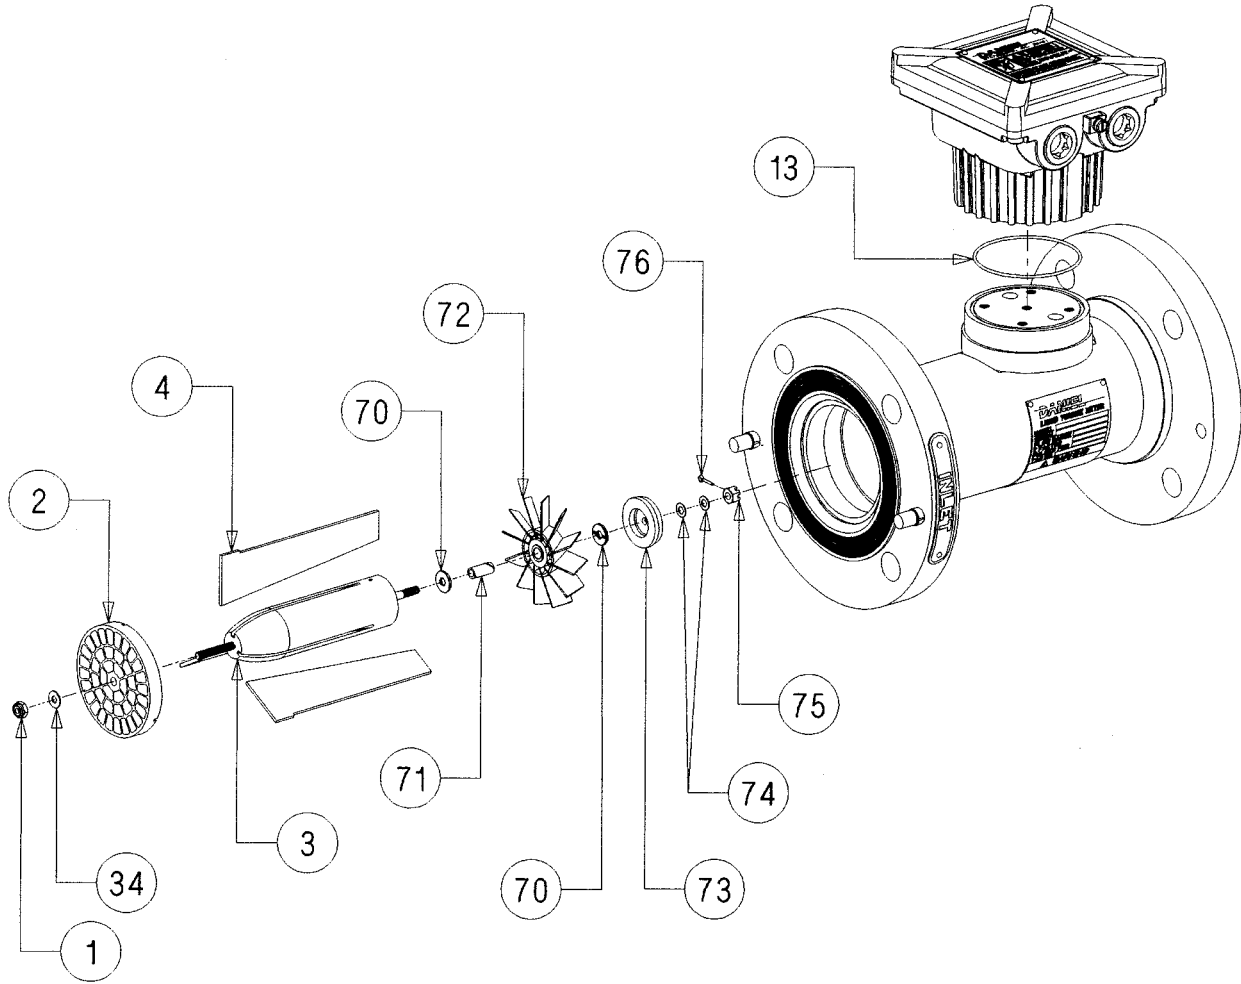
Meter Assembly (3" and 4") - Tungsten Carbide Bearing Internals
